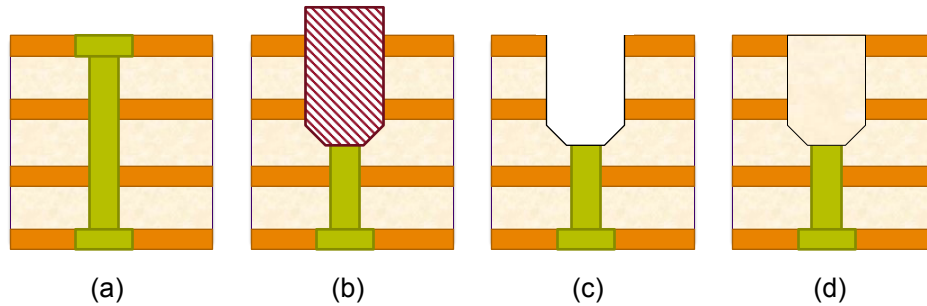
Process of back drilling: (a) start with a plated through hole, (b)-(c) a wider drill is applied to remove copper from unwanted layers, (d) the back drilled hole is filled with epoxy. There is an unwanted stub left over due to back drill tolerance.
